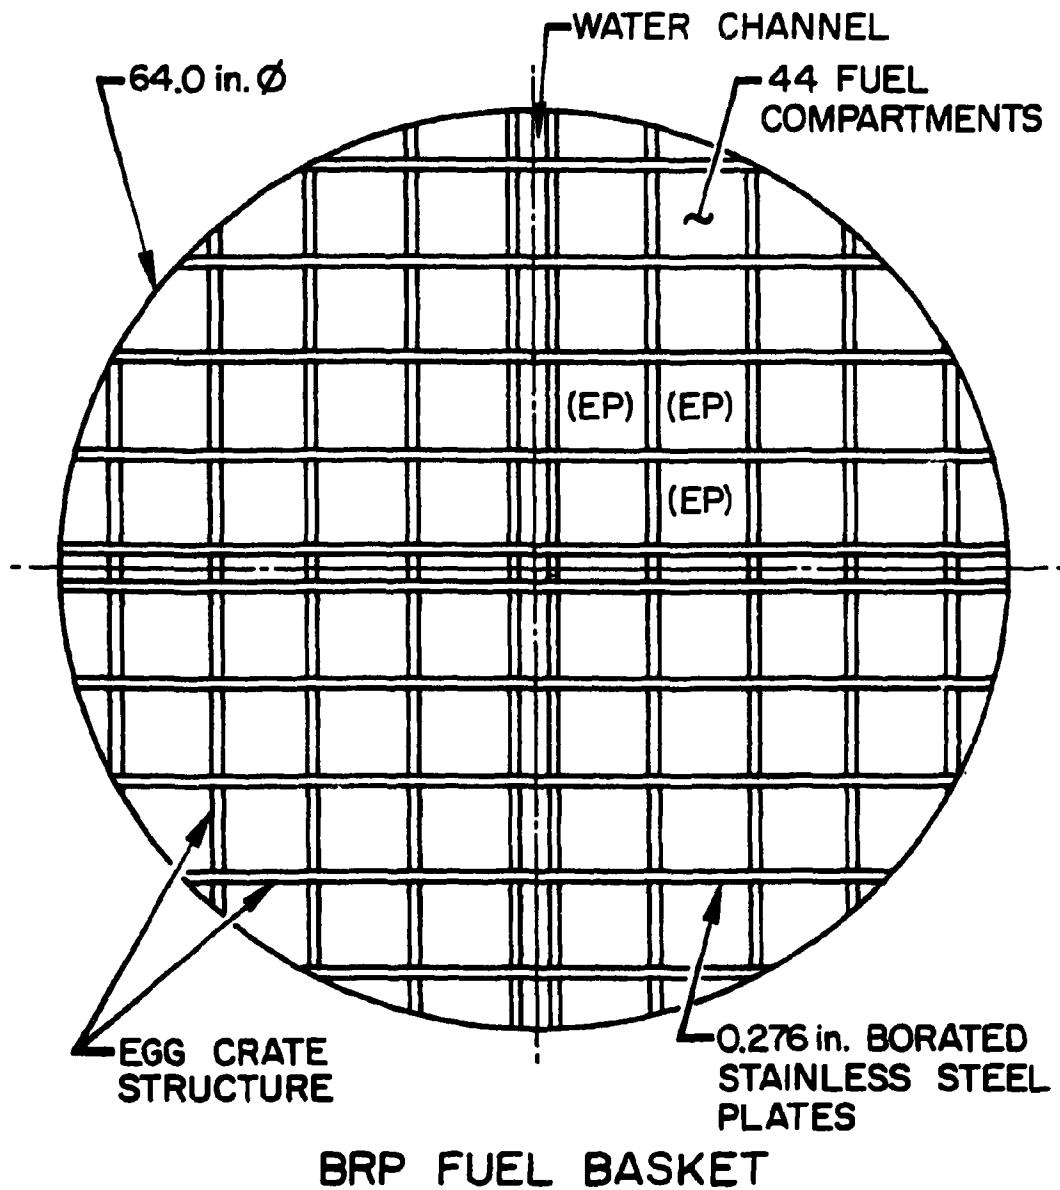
Location of EP fuel assemblies for case BRP6 loading.
